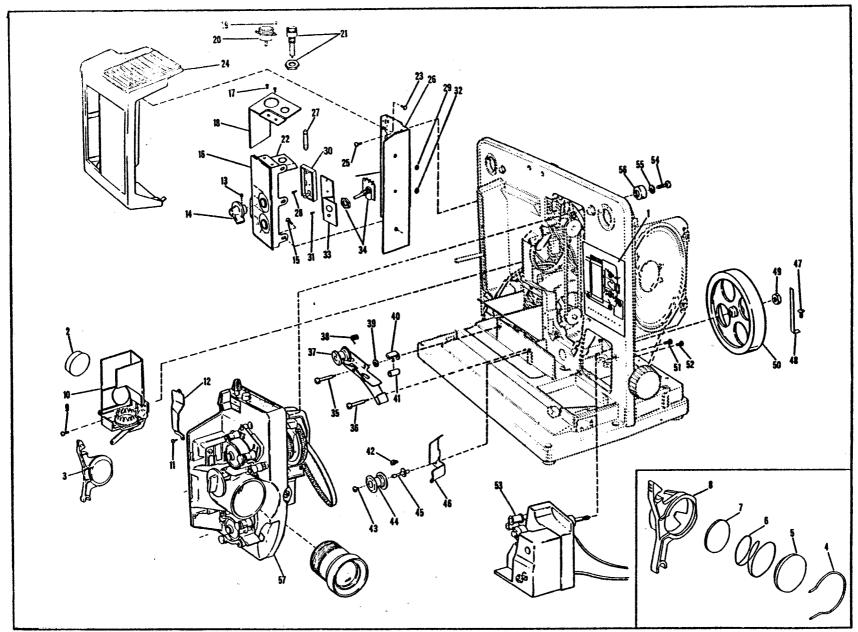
Filmosound Projector Main Plate Exploded (Sheet 2)
